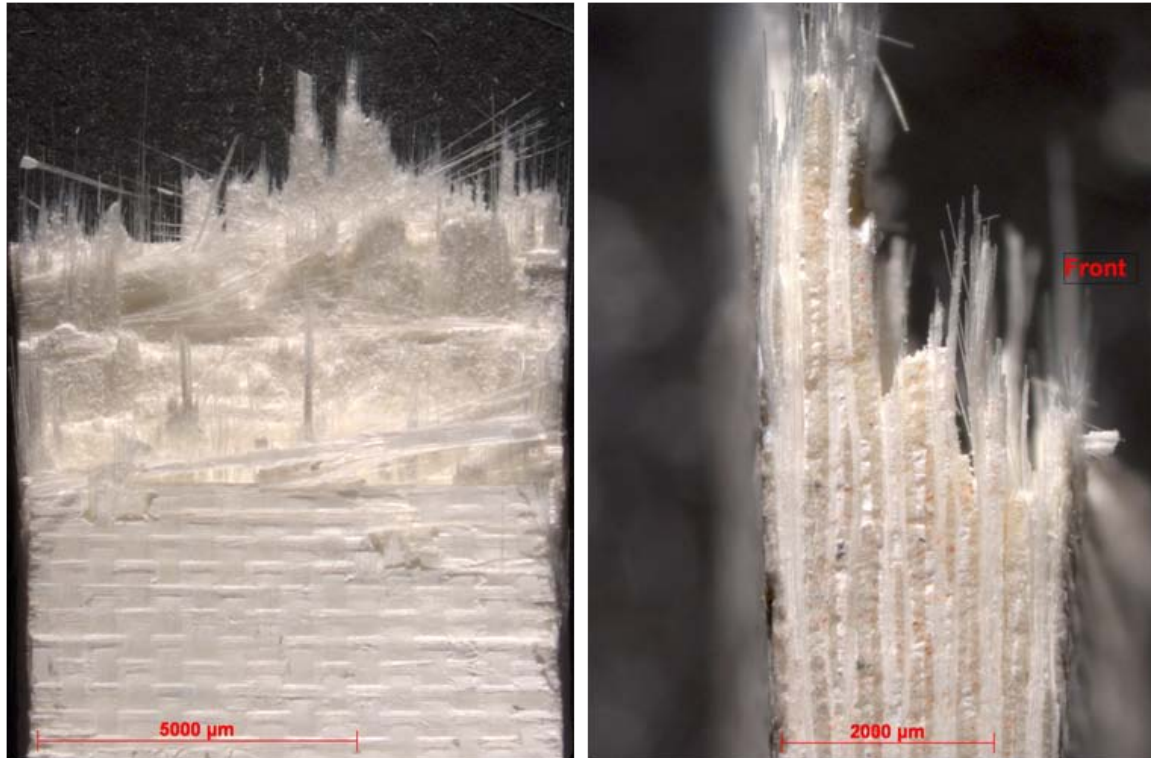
shows the front view of the tensile strength test specimen fracture surface. The specimen was only inspected with the optical microscope. Before the specimen could be removed after the test, the power to the MTS computer was cut off. This caused the crosshead to come back down onto the other half of the specimen, damaging the fracture surface. Fortunately, the general profile of the fracture surface was maintained.
